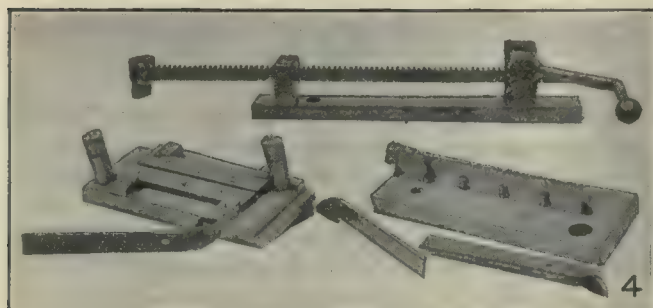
THE TUBE FORMING DIES. FIG. 5. ATTACHMENT FOR REMOVING THE FORMED WORK
